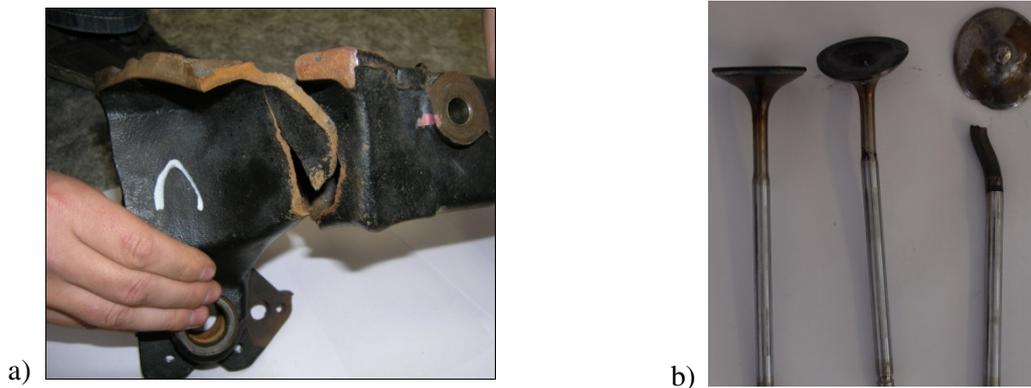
Examples of the analysed components: a – part of the car chassis, fracture; b – valves, creep
